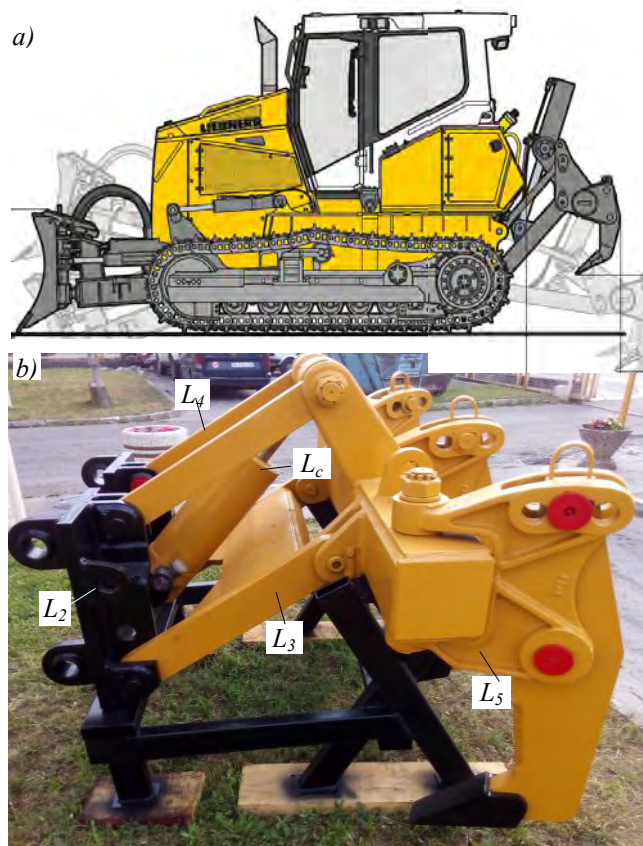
Physical models: a) Liebherr PR 716 XL crawler tractor, b) Brana komerc ripper
